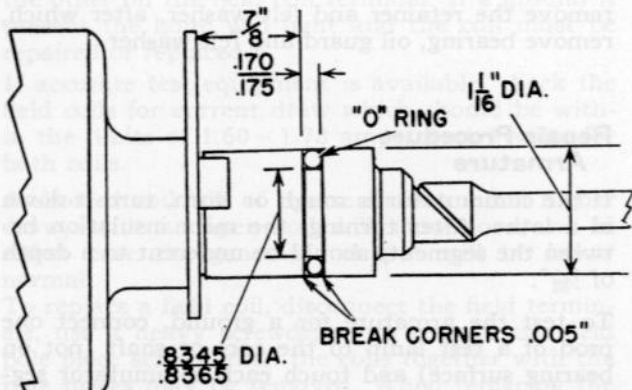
DISTRIBUTOR "O" RING INSTALLATION
